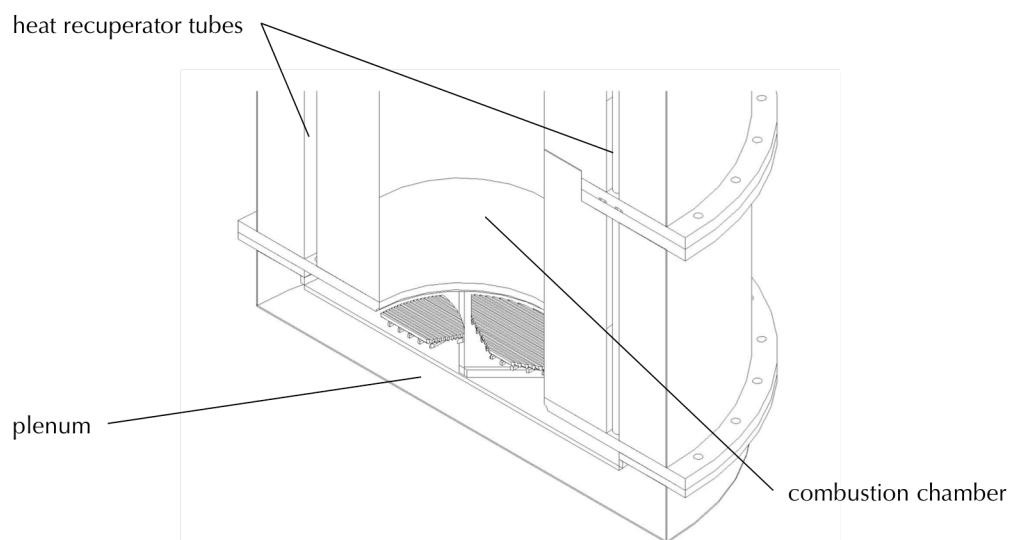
Design of the porous burner system (exploded view) (configuration 2).
